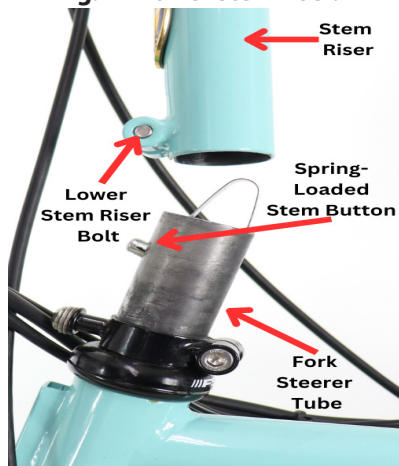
Mounting stem riser, part 1. Fig. 16 Mounting stem riser, part 2.
